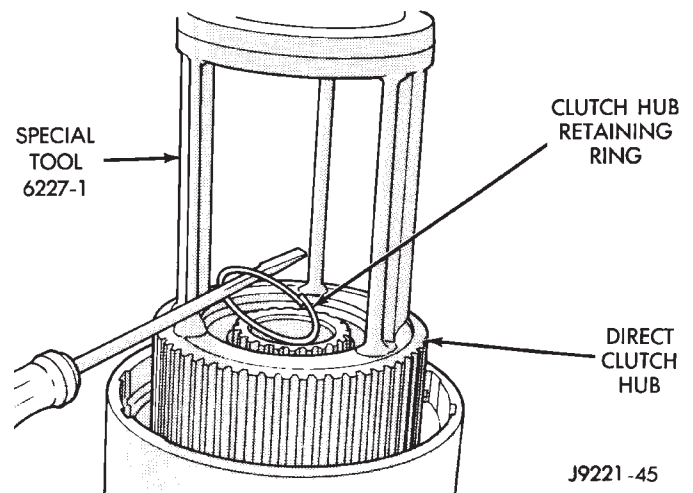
Removing Direct Clutch Hub Retaining Ring
